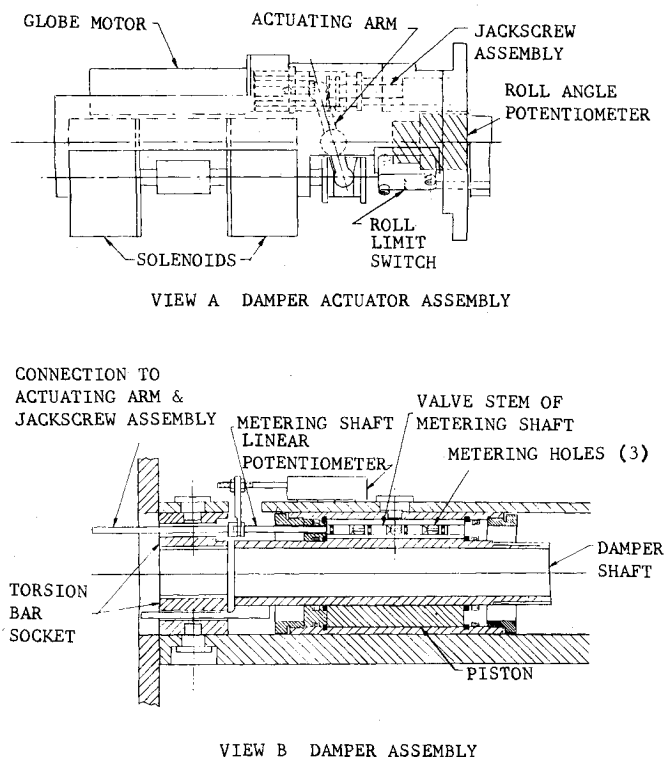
Details of the flexible roll device actuator and damper assemblies.
